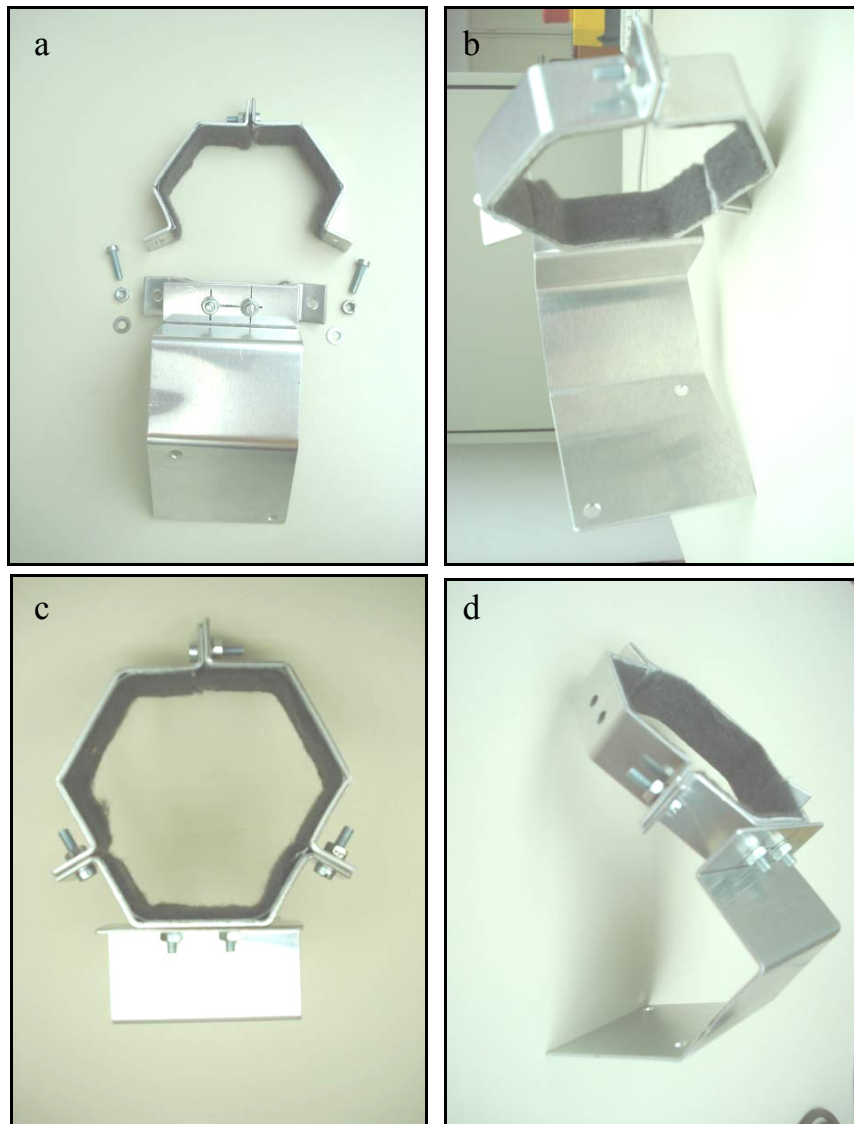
Final part, a) before final assembling, b) frontal view,
